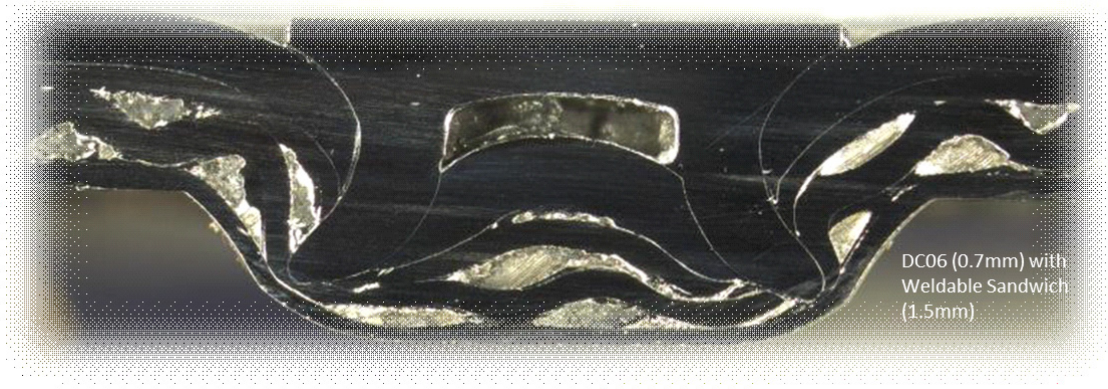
Structure of Weldable Sandwich after mechanical joining with a half-hollow rivet
